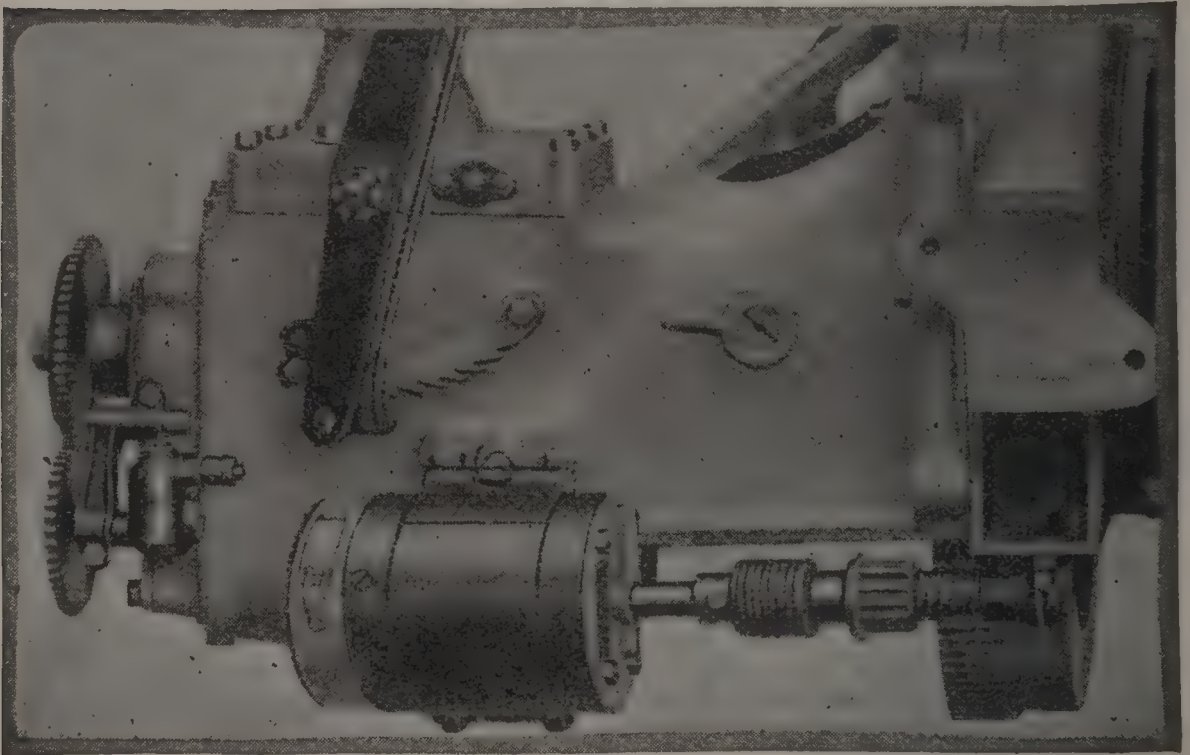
Installation of a Westinghouse starting motor on the Chalmers six
